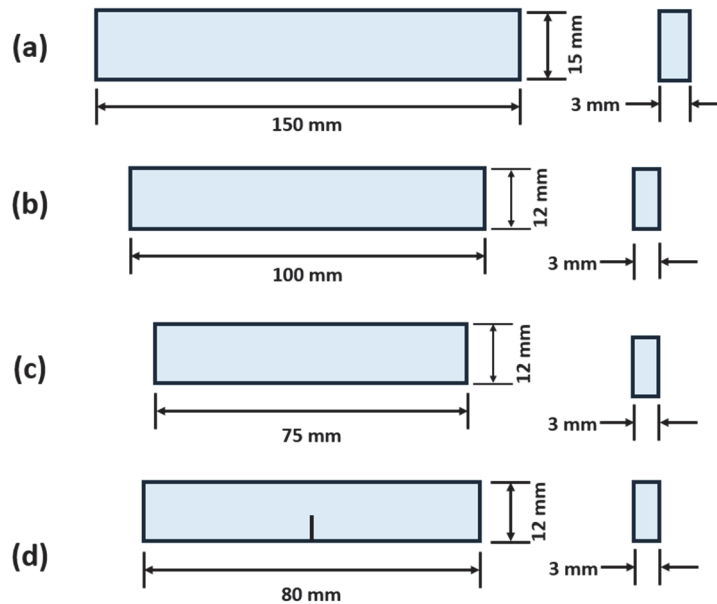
Dimensions of a) Tensile test specimen b) Flexure test specimen and c) Impact test specimen d) Fracture test specimen.
